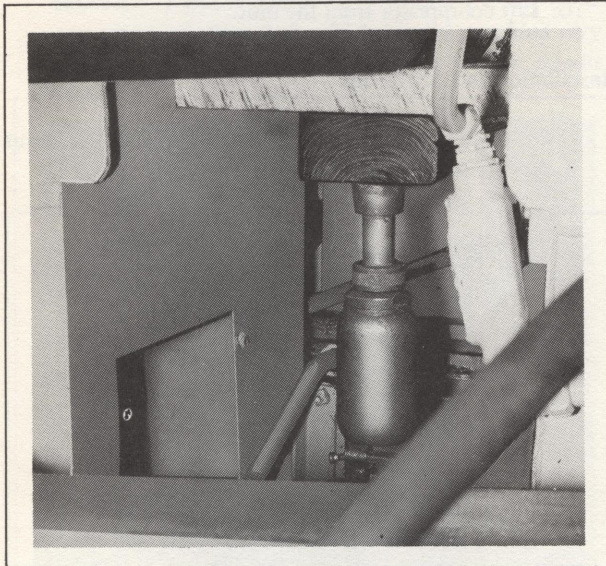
BLOCKING LONG SHAFT AT COMPRESSOR END.
